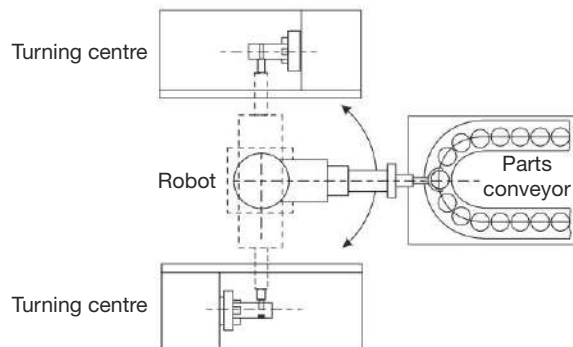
Flexible machining cell with turning centres and a robot serving as the material handling unit
